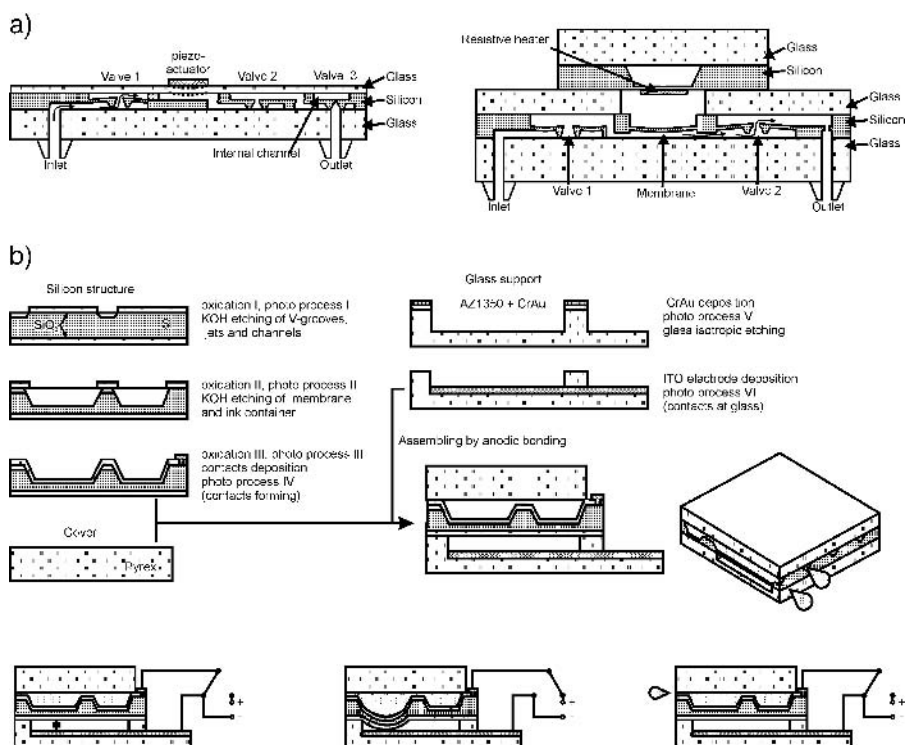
Multi-layer glass-silicon-glass fluidic devices: a) double- and triple-valve micromechanical pump, b) fabrication process, principle of operation and schematic drawing of head of ink-jet printer; a) [253], b) [254].
